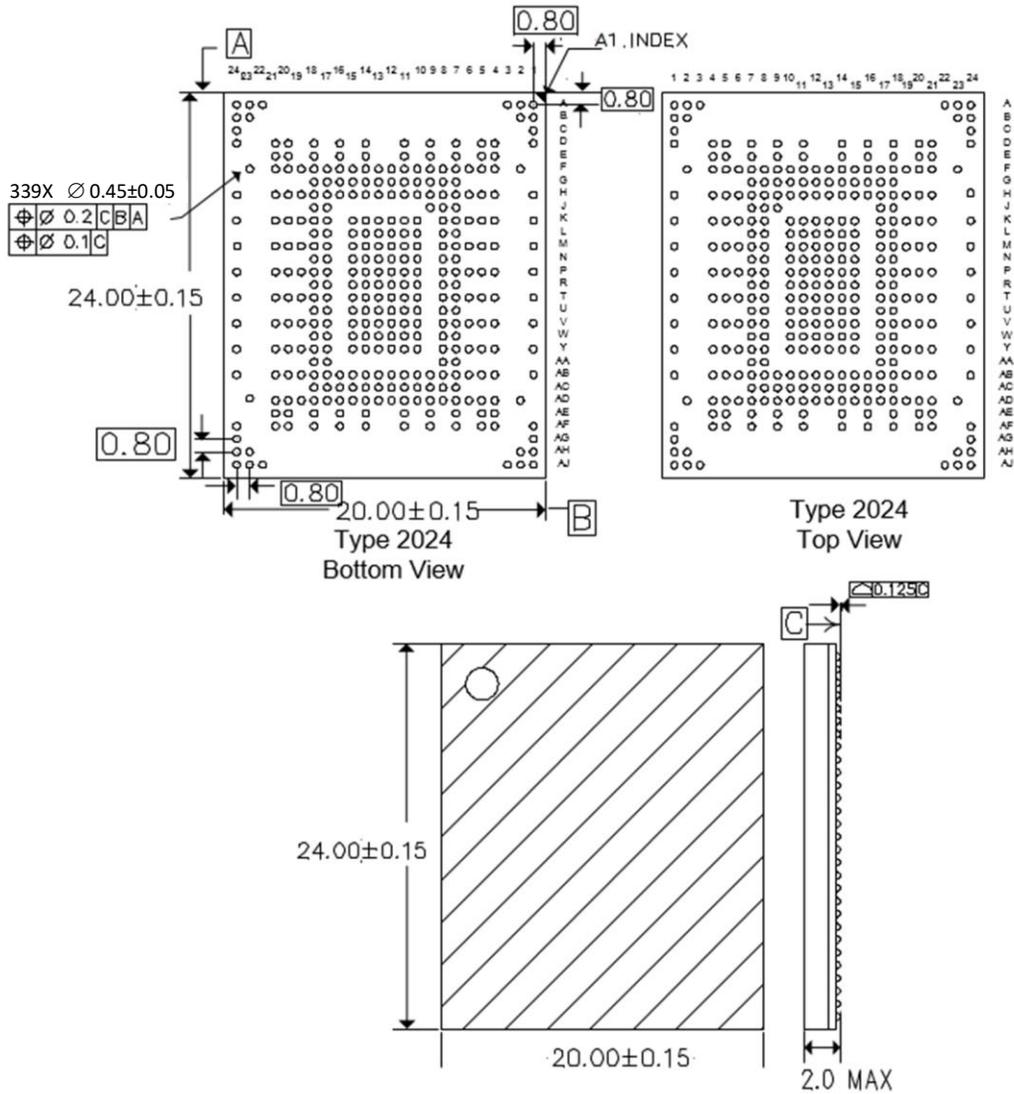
M.2 Type 2024-S5 Mechanical Outline Drawing Example
